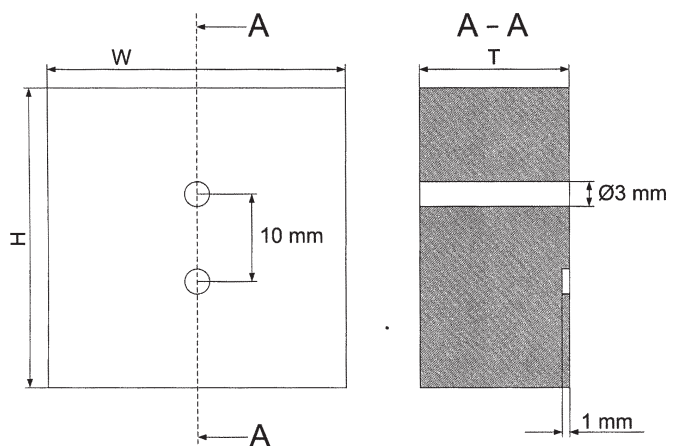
Specimens for compressive testing (W width, H height, T thickness)
